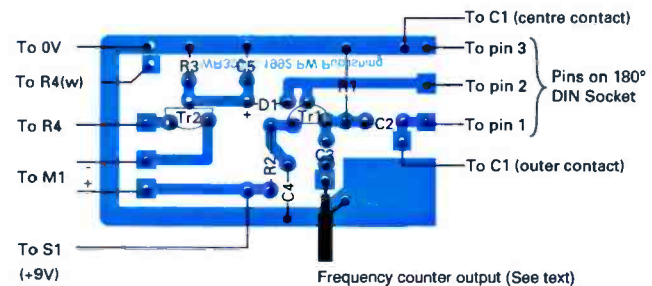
The circuit board layout, with the overlay as seen from the component side of the board.
